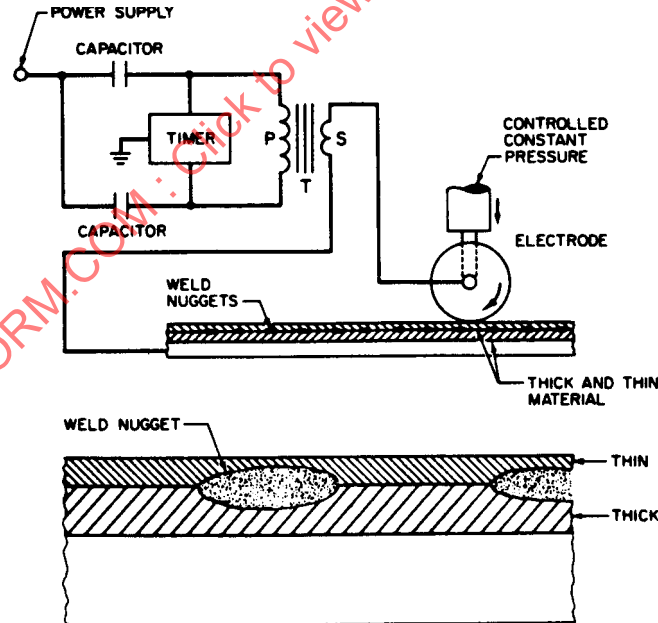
ROLL RESISTANCE-SPOT WELDING MACHINE
